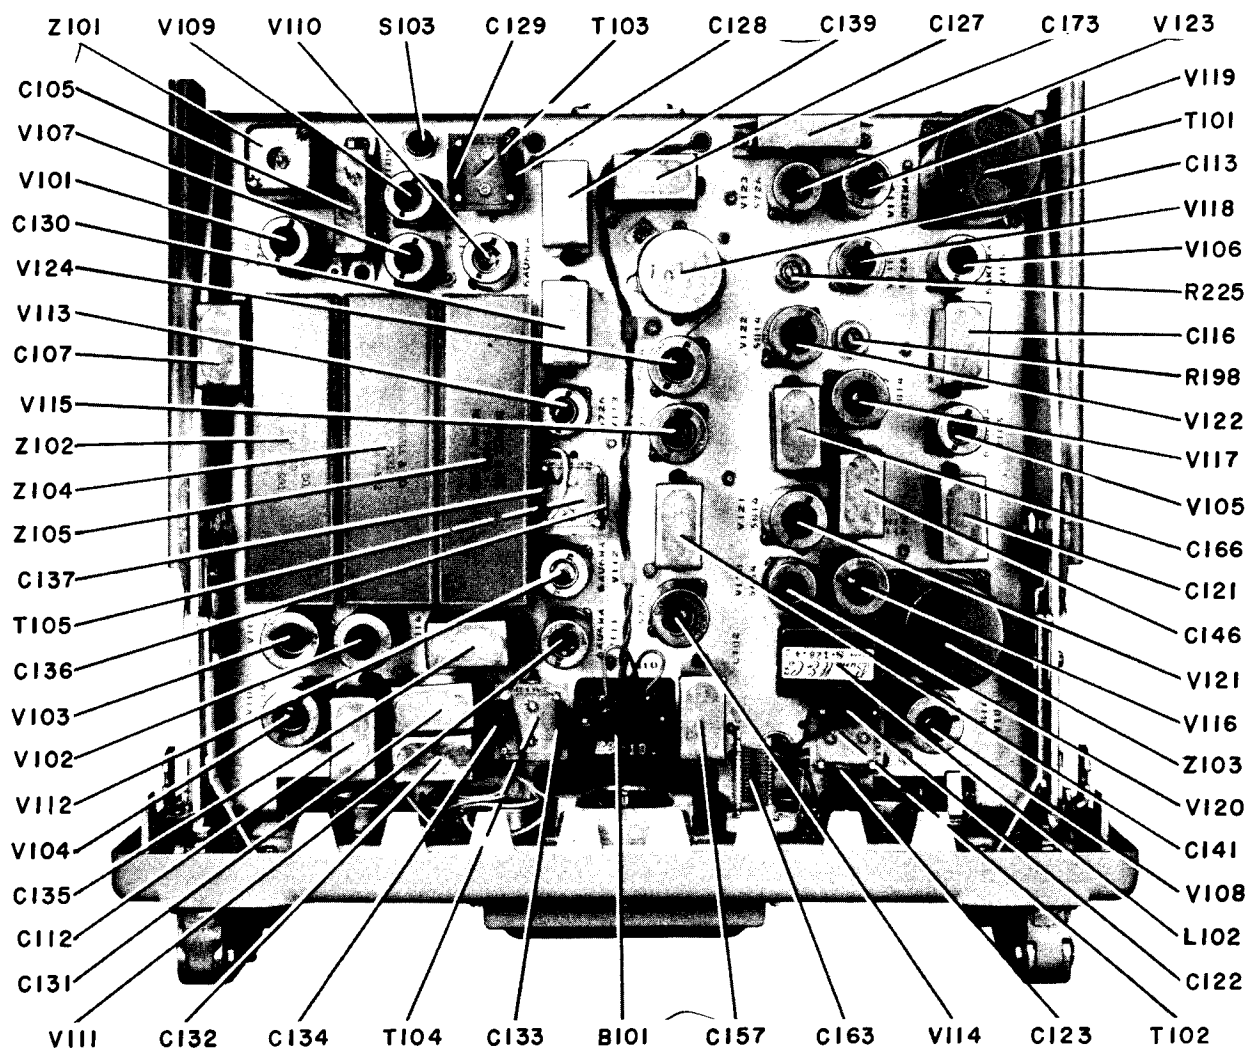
Component Locations, Top of Chassis, Upper Unit
